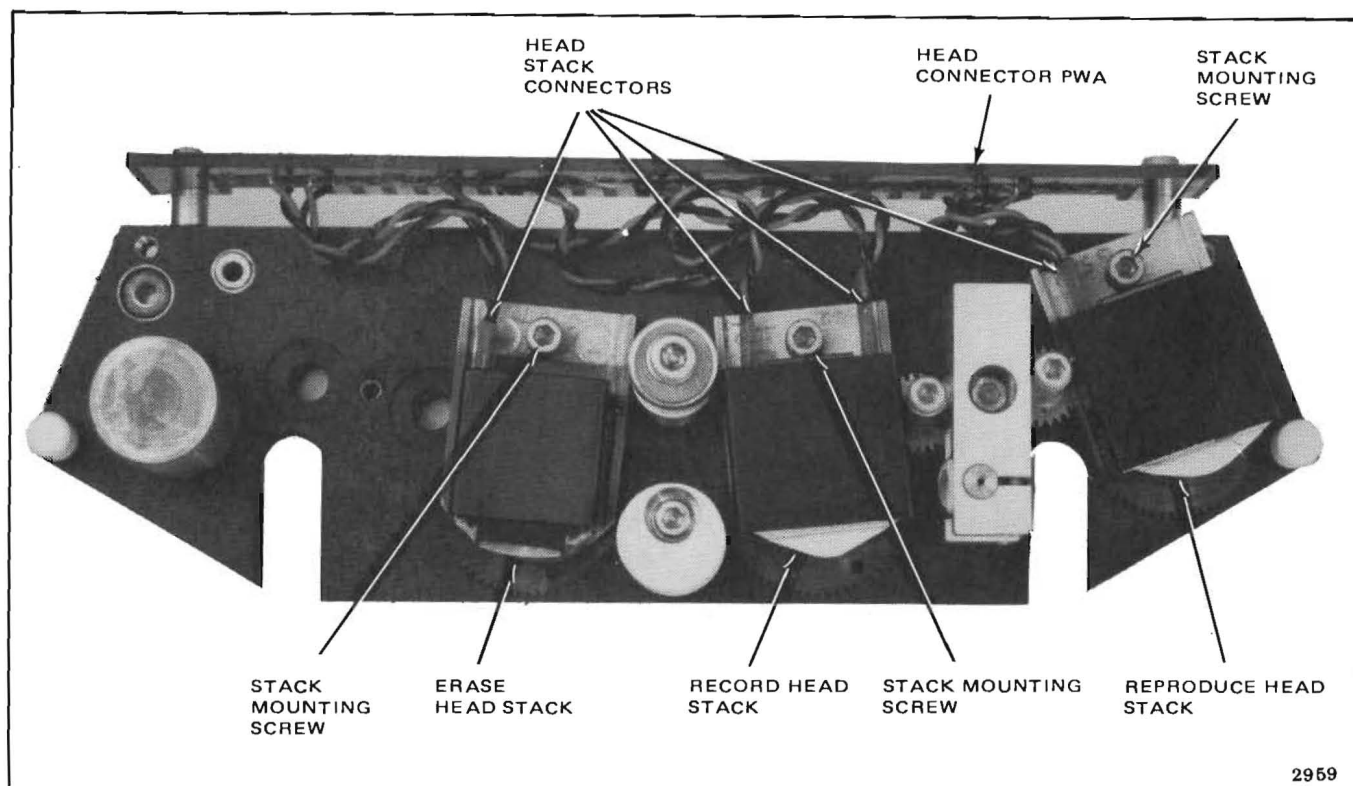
Top View of Head Assembly with Main Head Shield Removed
